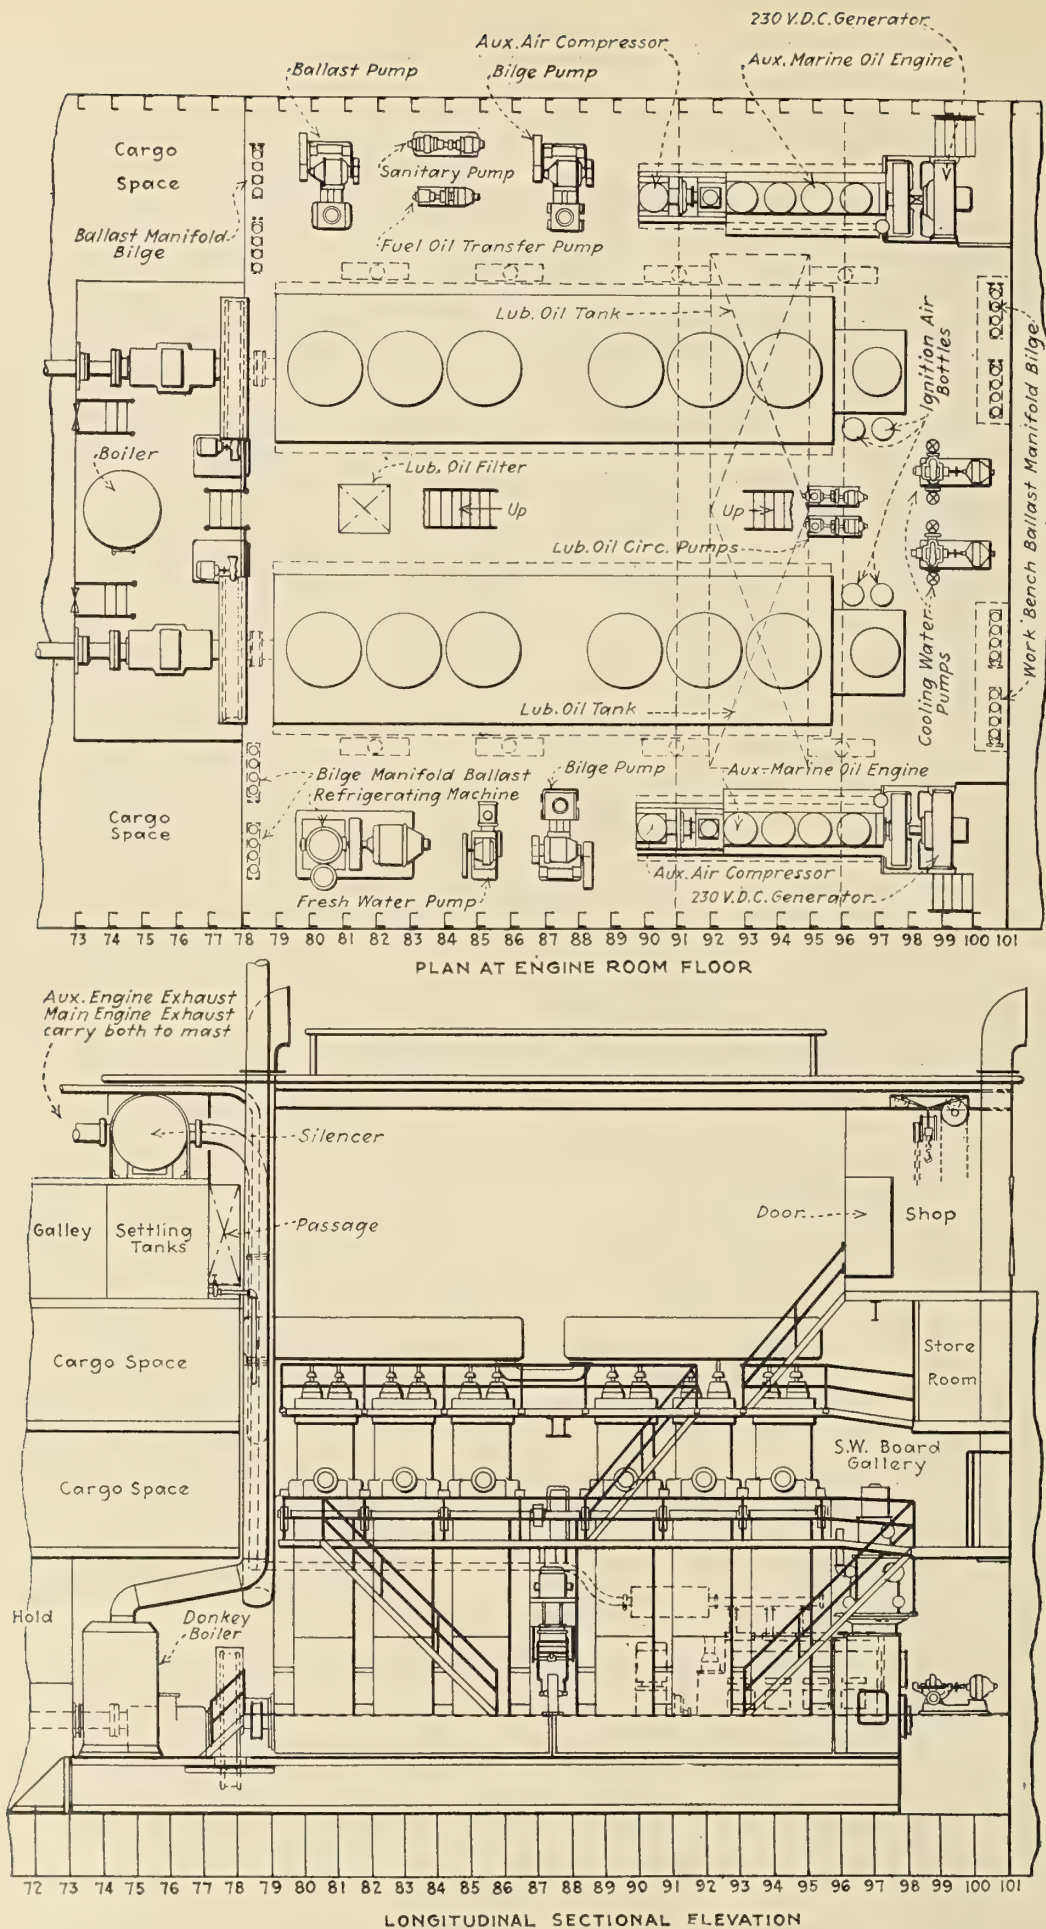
Plan and Longitudinal Sectional Elevation of Engine Room for Proposed Twin-Screw Vessel Equipped With Worthington Diesel Engines and Auxiliaries
